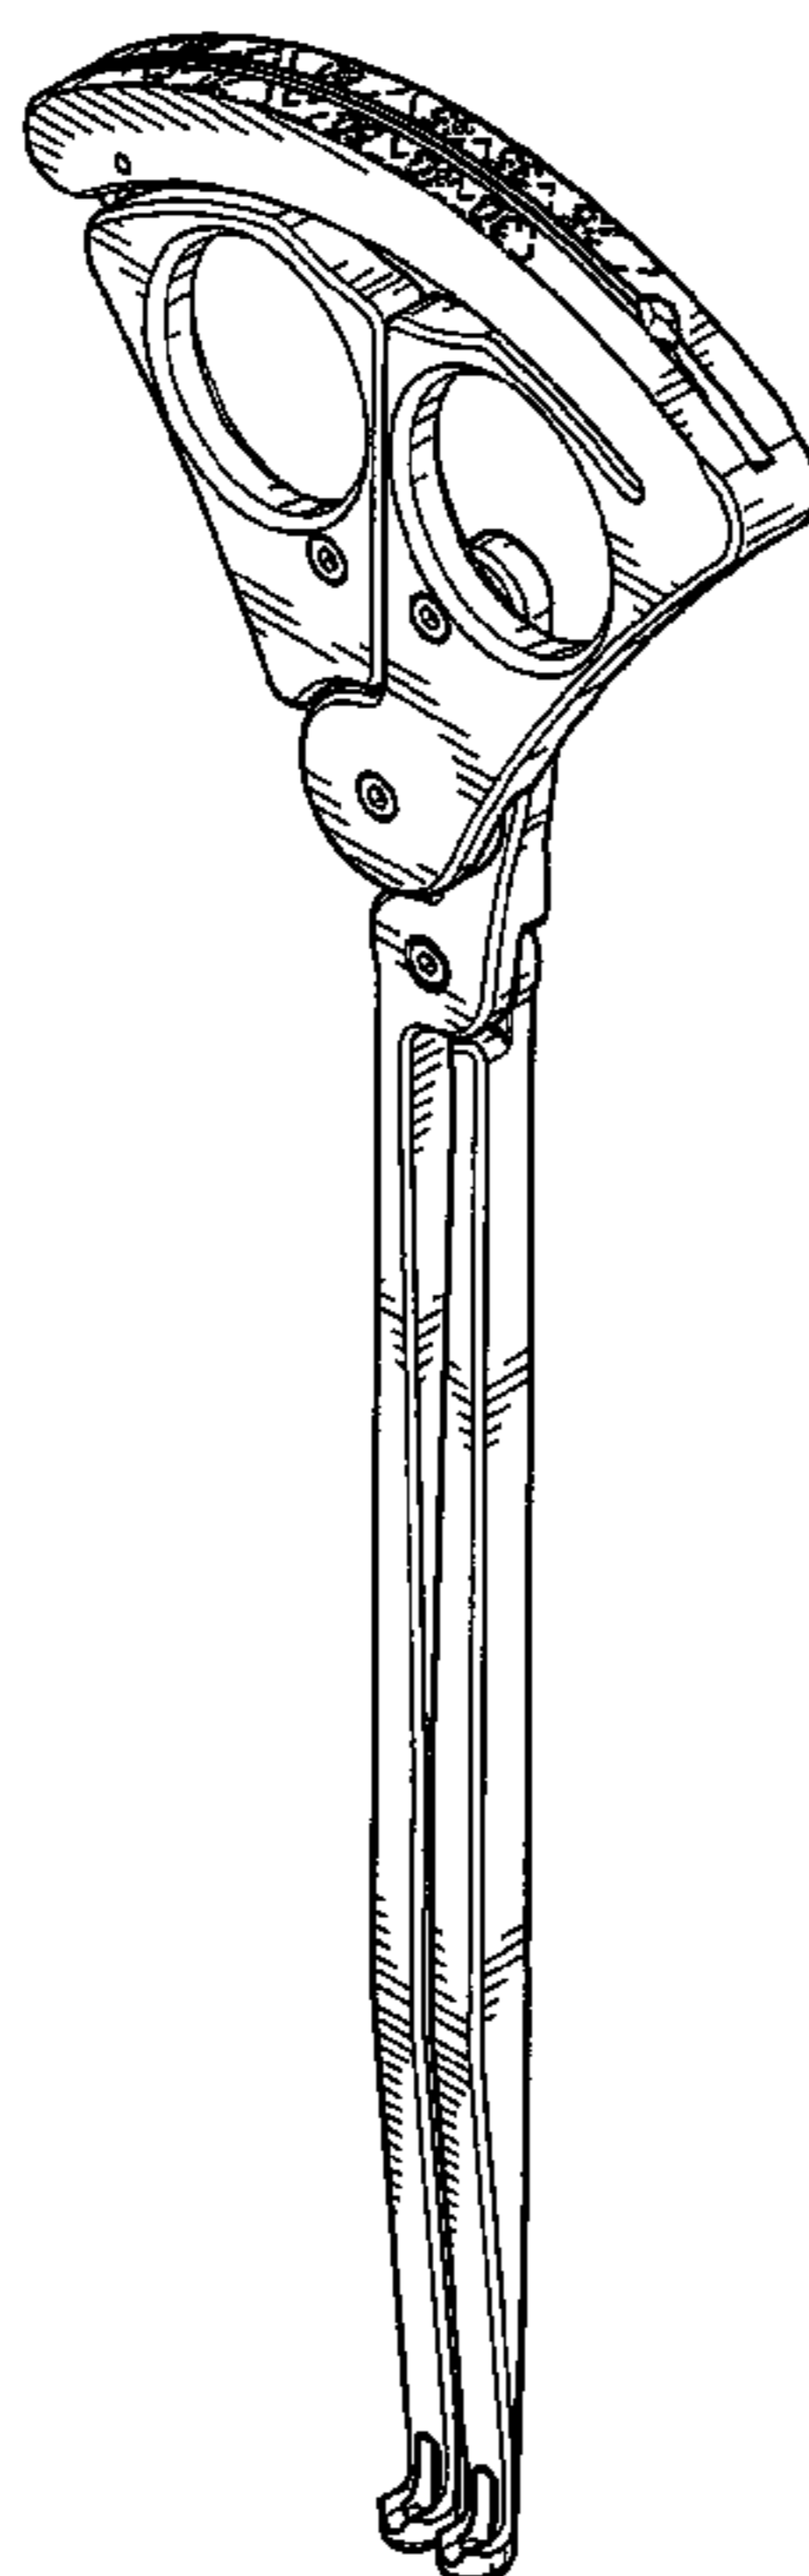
is a front elevation view showing the rod length indicator fully open;
